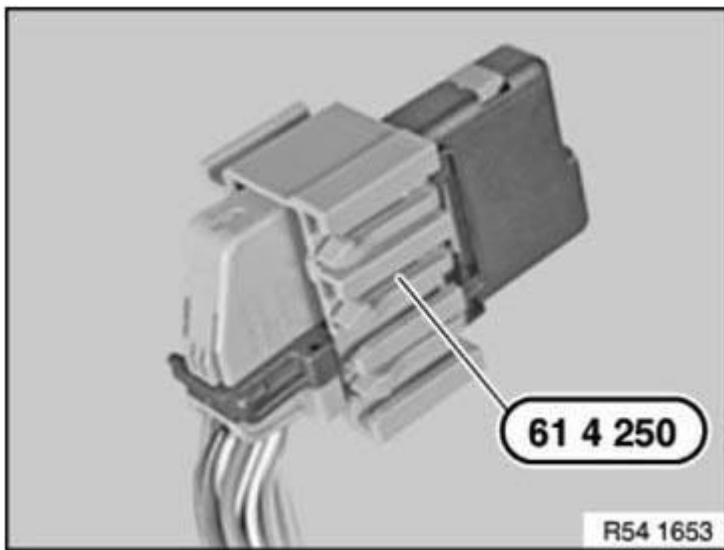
Identifying Special Tool 61 4 250 To Vehicle-Side Plug For Rear Module
